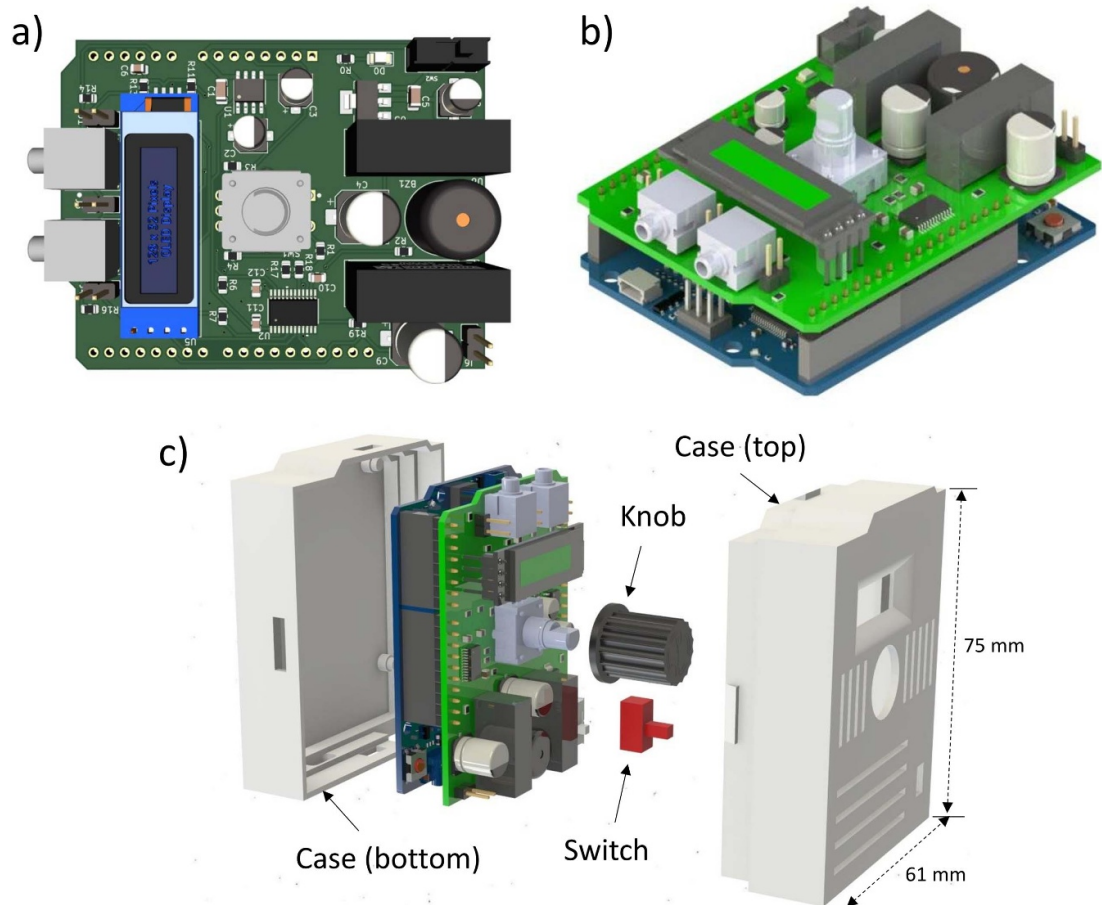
(a) 3D electronic design automation (EDA) model of assembled stimulator shield board. (b) Stimulator shield board stacked on an Arduino Uno Microcontroller development board through standard header pins. (c) Stimulator case, knob and switch printed using a 3D printer to house the stimulator board.
